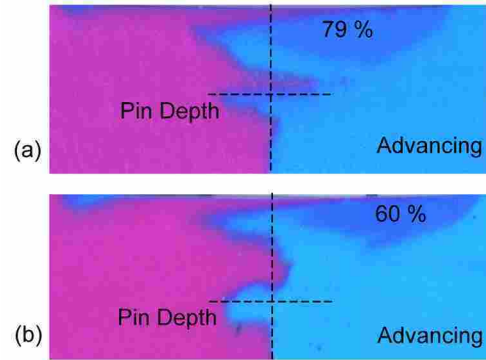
Cross-sections of plasticine welds performed at high tool depth such that the leading edge of the shoulder was 1 mm below the surface of the workpiece (250 rpm, 1.1 mm/s feed): (a) threaded pin; (b) smooth pin.
